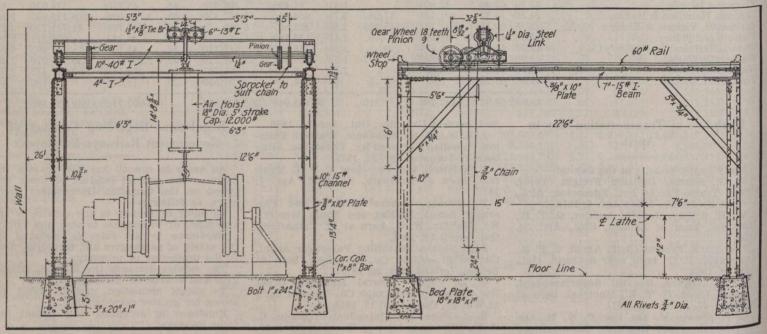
C.N.R. Locomotive House Machine Shop Crane for Wheel Lathe.
